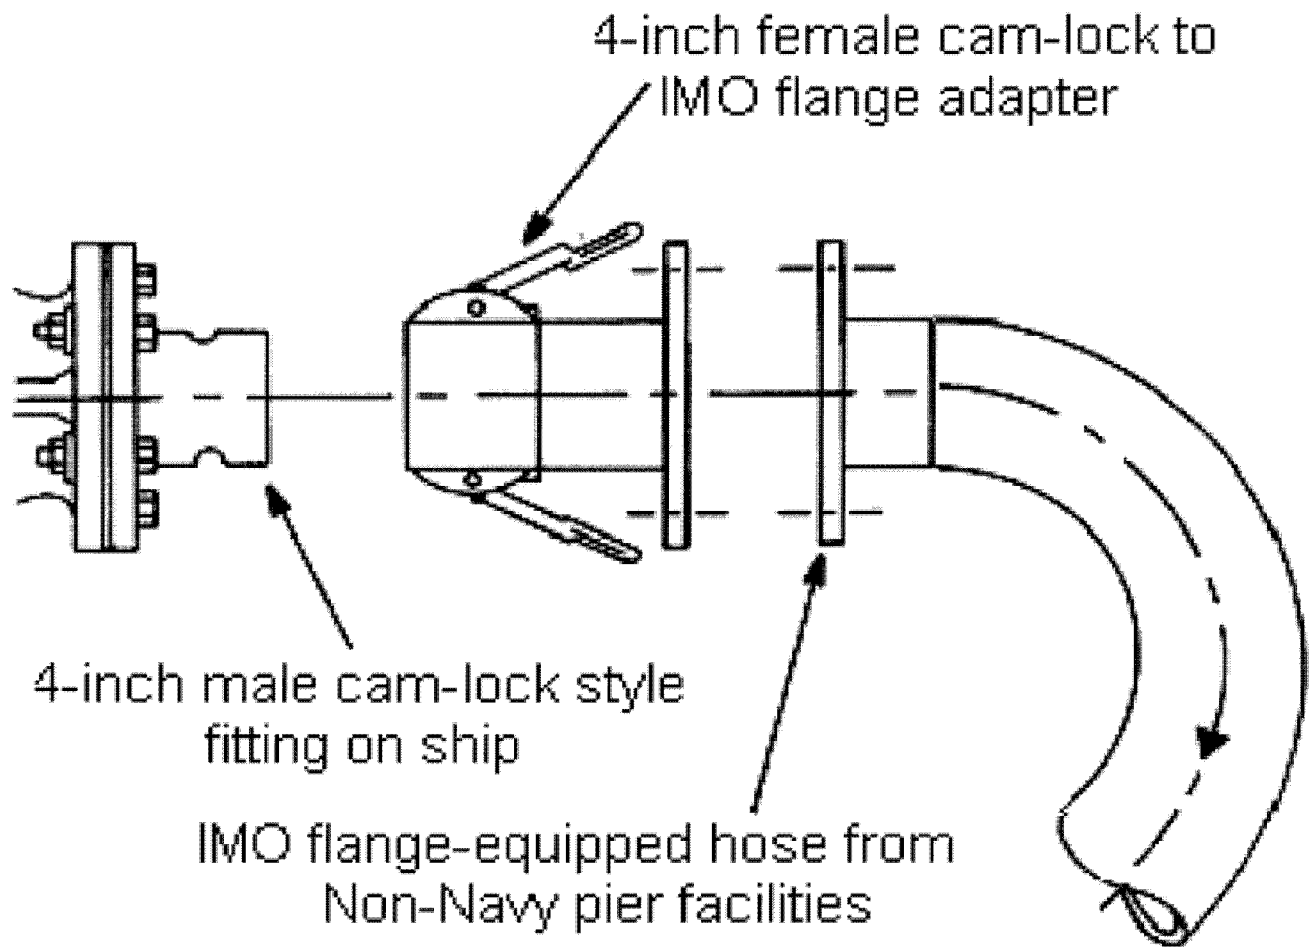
Four-inch Female Cam-Lock to IMO Flange Adapter
